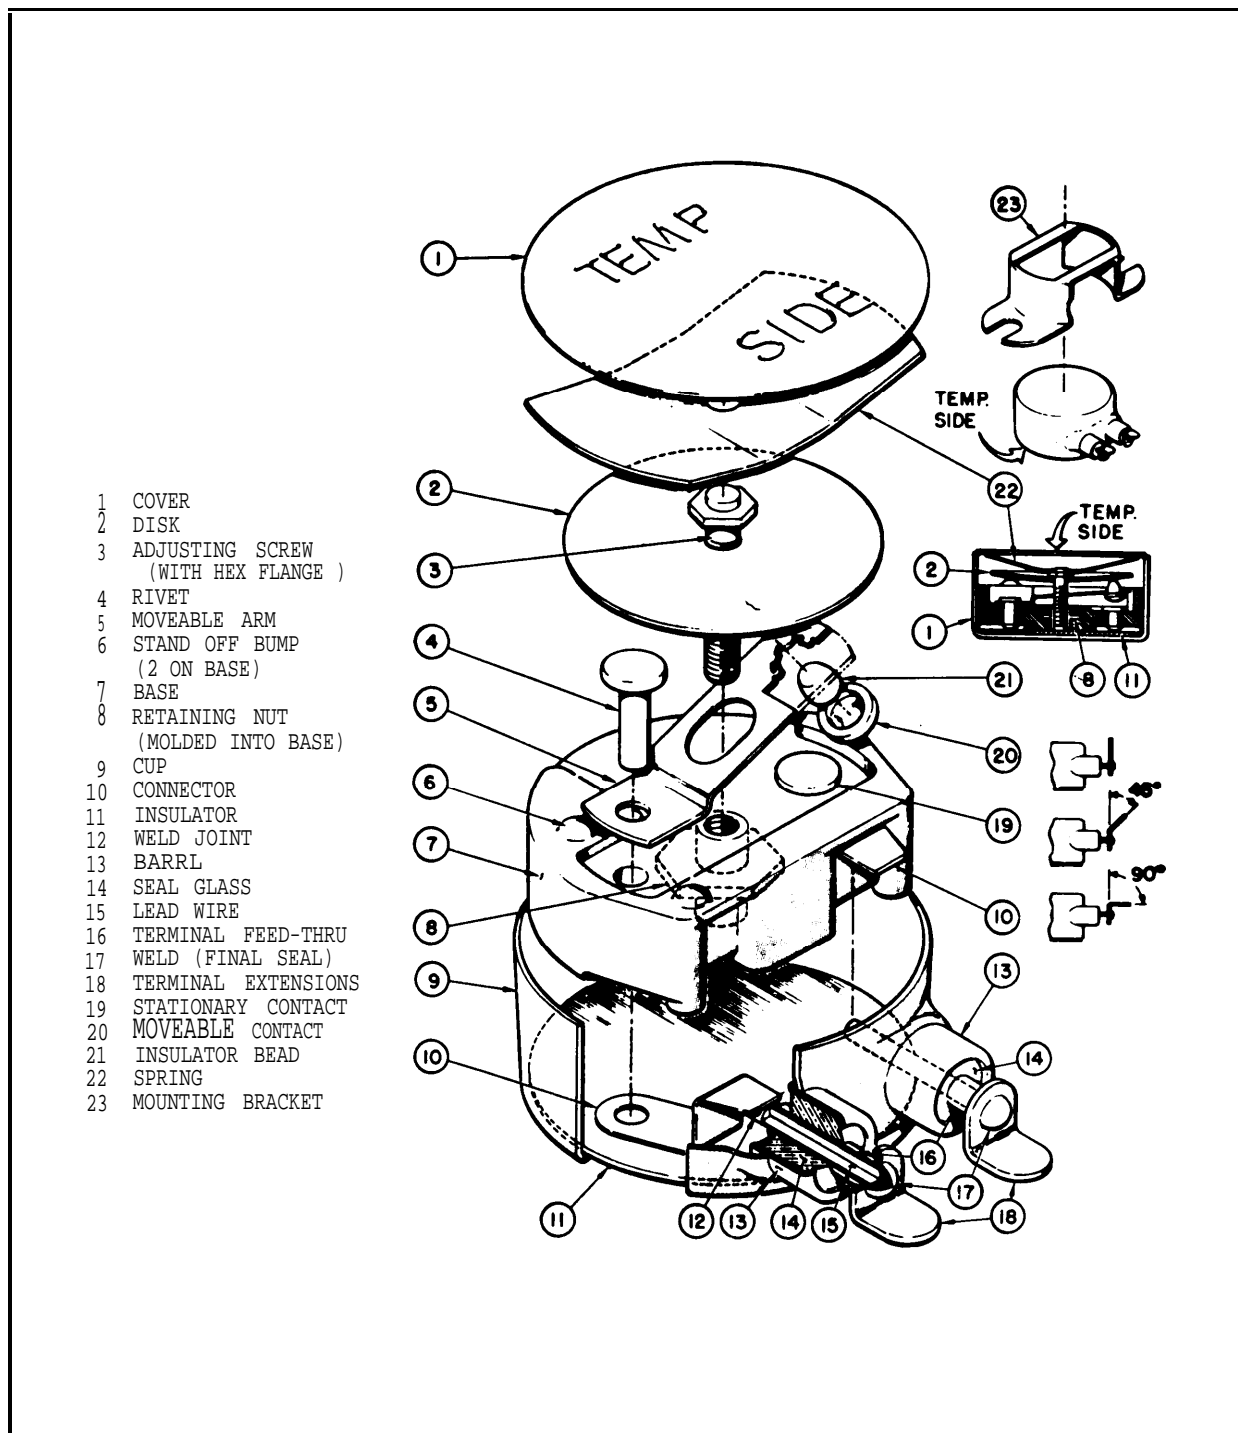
Type C thermal switch exploded and cross-sectional views.
